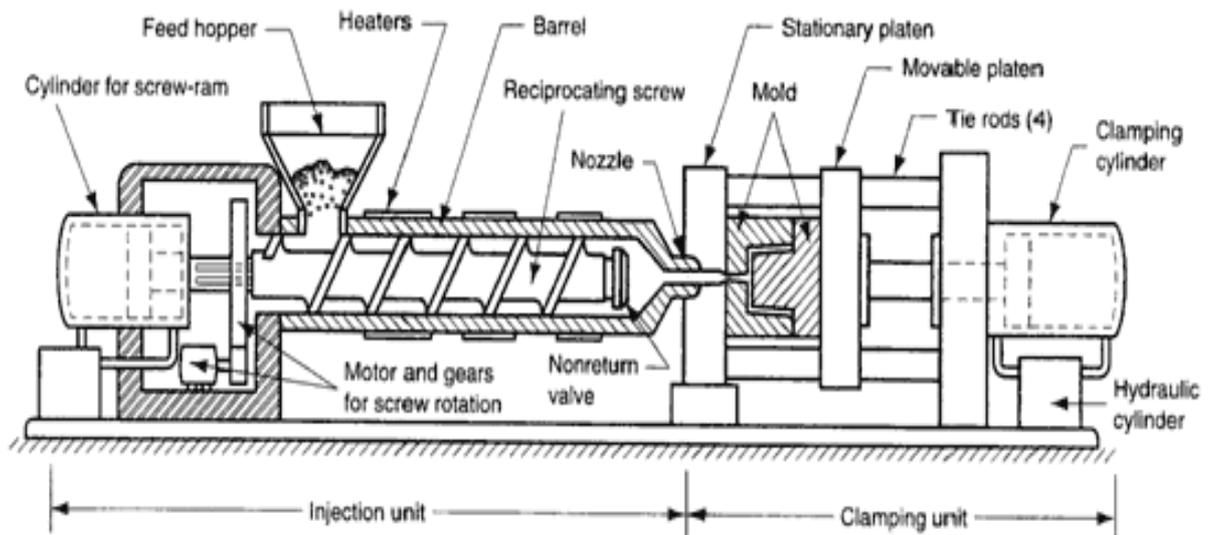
Schematic presentation of an injection moulding machine [95].
